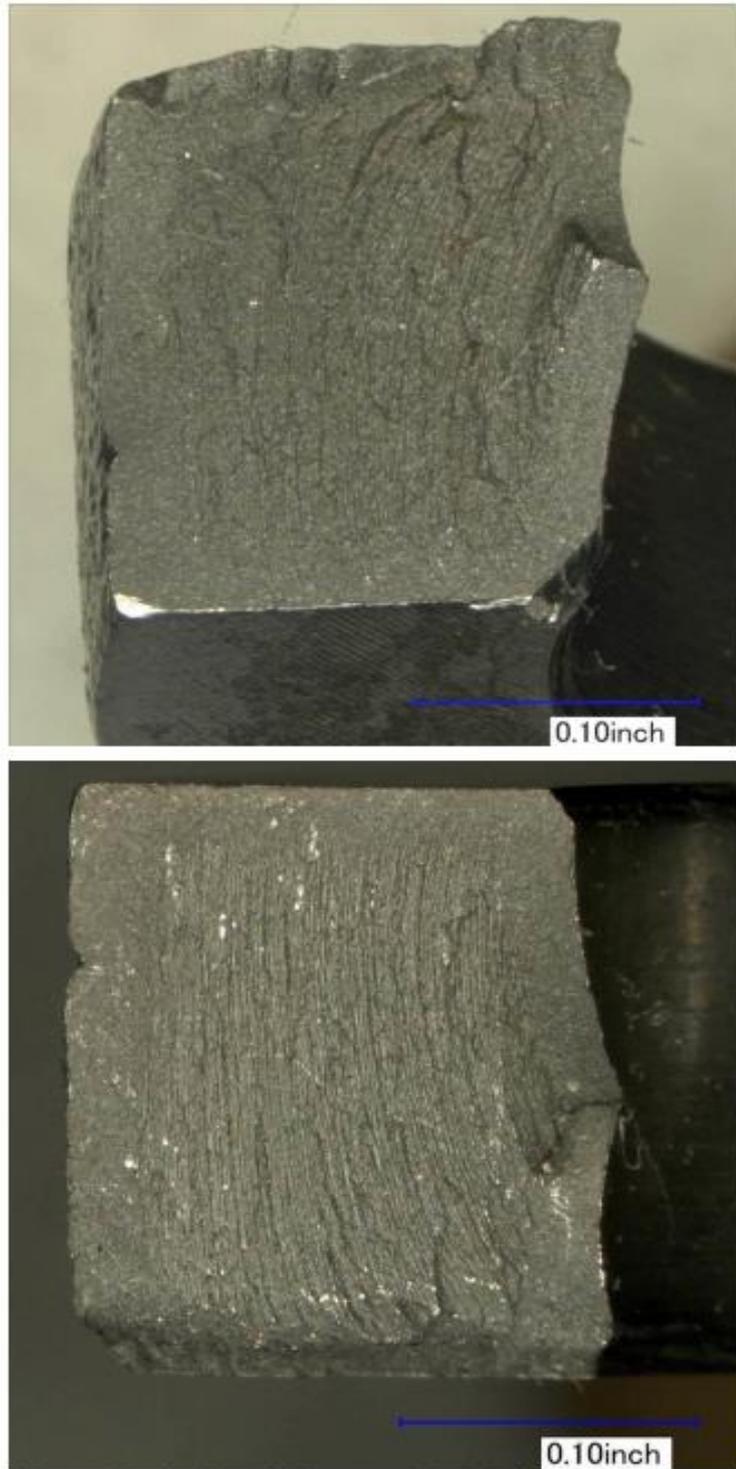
Left side of idler gear bolt hole fracture surfaces.
